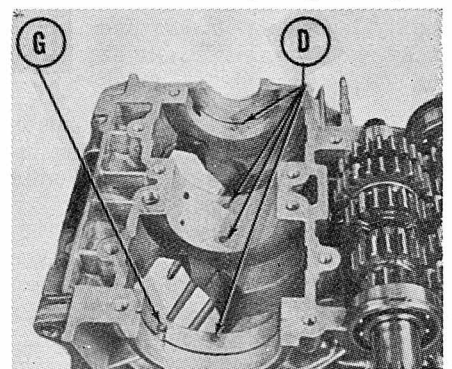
When installing crankshaft, make certain that dowels (D) engage holes in all four main bearing outer races. Align open space of snap ring (15—Fig. Y8-14) with oil groove (G).
